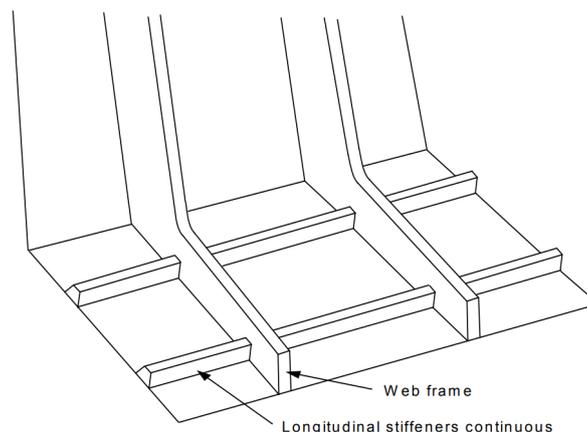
Typical stiffener and frame structure (DNV, 2012).
